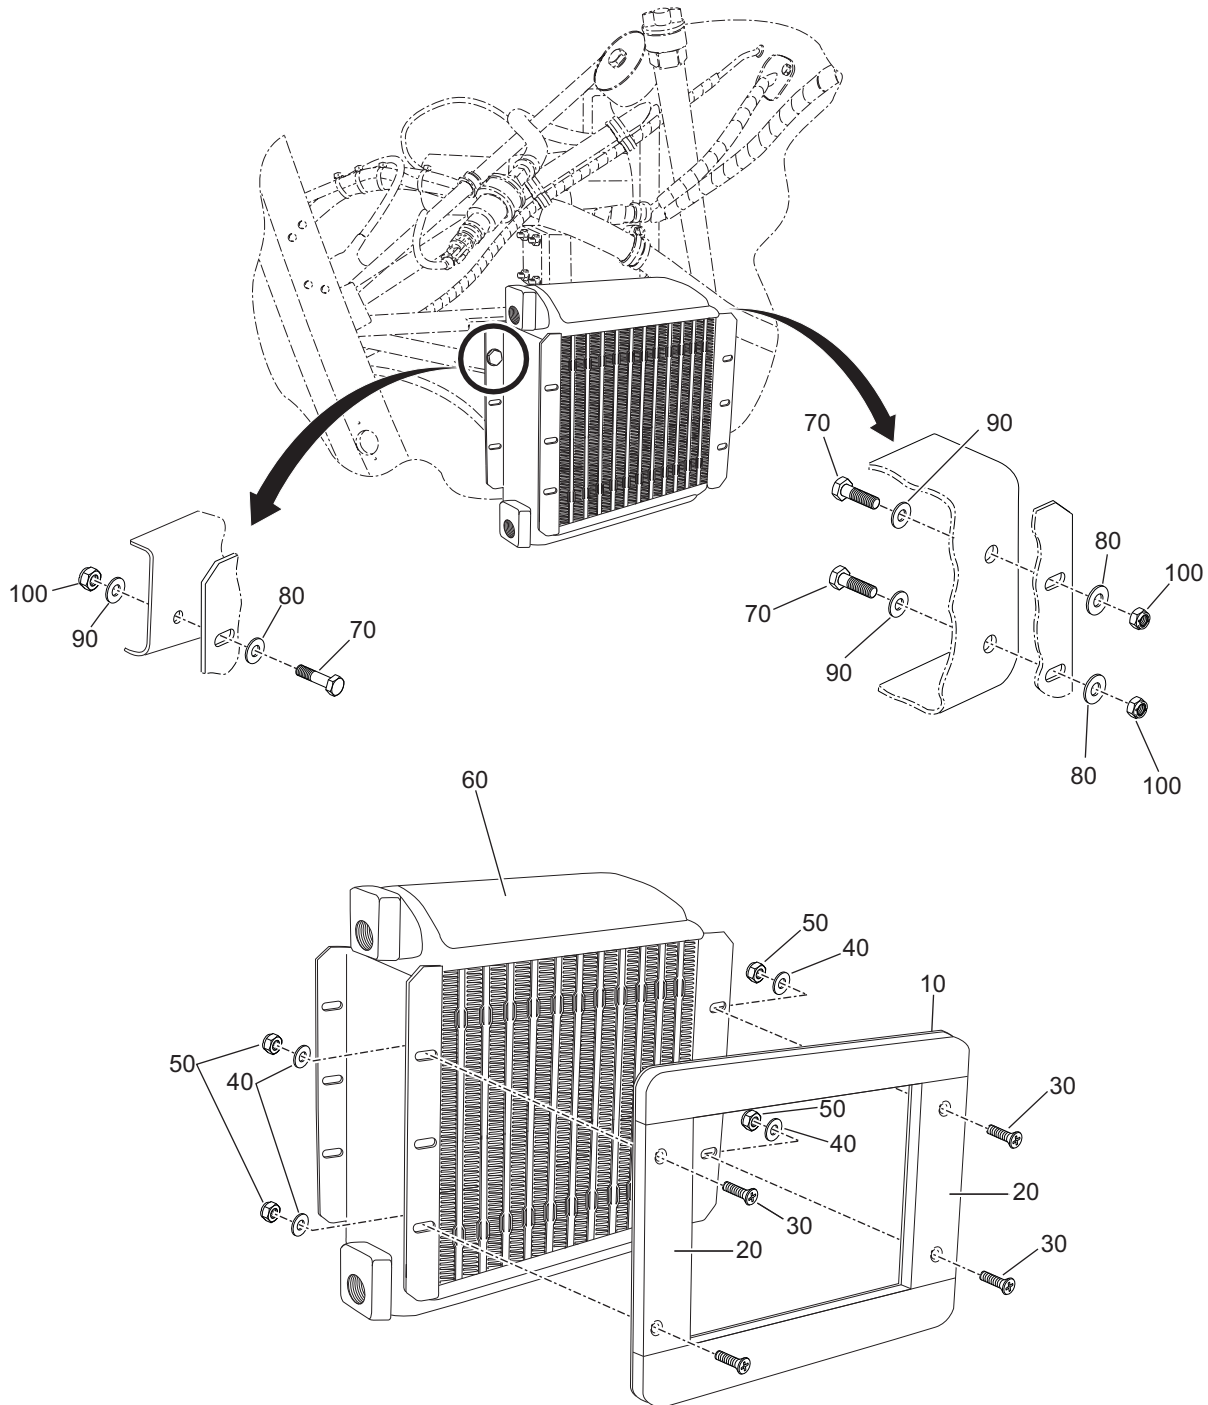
Engine Oil Cooling System (Sheet 1 of 2)
